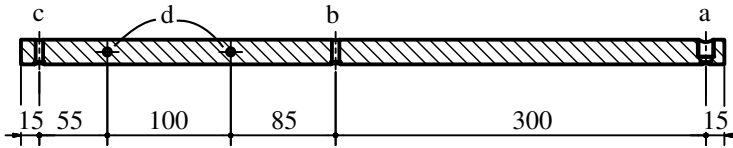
Top view on the geometry of the cylindrical copper rod (diameter of 20 mm). The HFM sensor is placed in drilling *a*, the rotors are attached with axles in drillings *b* and *c*. Drillings *d* are used to attach additional weight required to shift the center of gravity exactly to drilling *b* and to fix signal cables.
